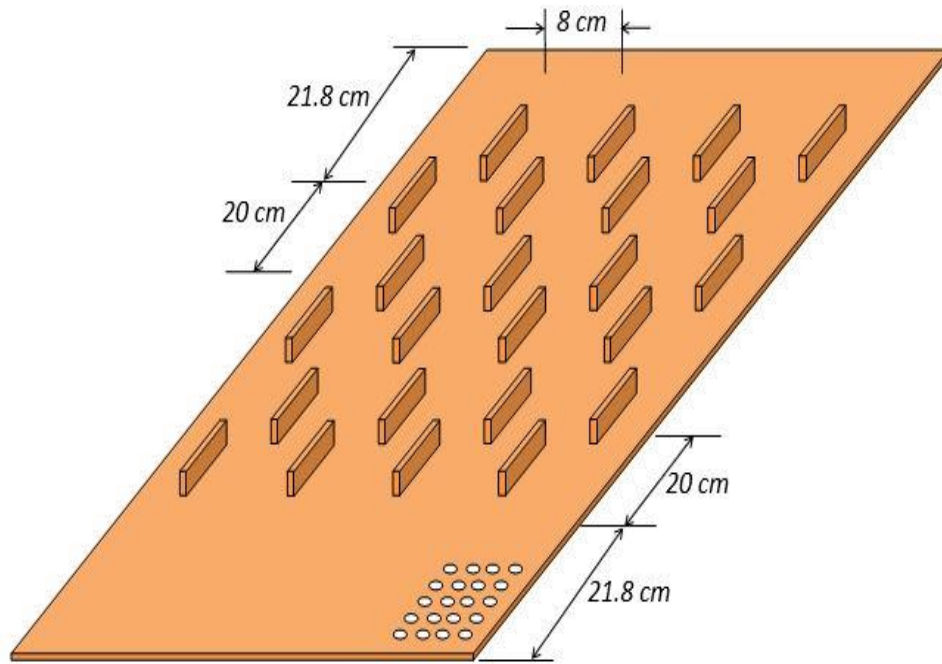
Vertically finned absorbing surfaces dimensions
